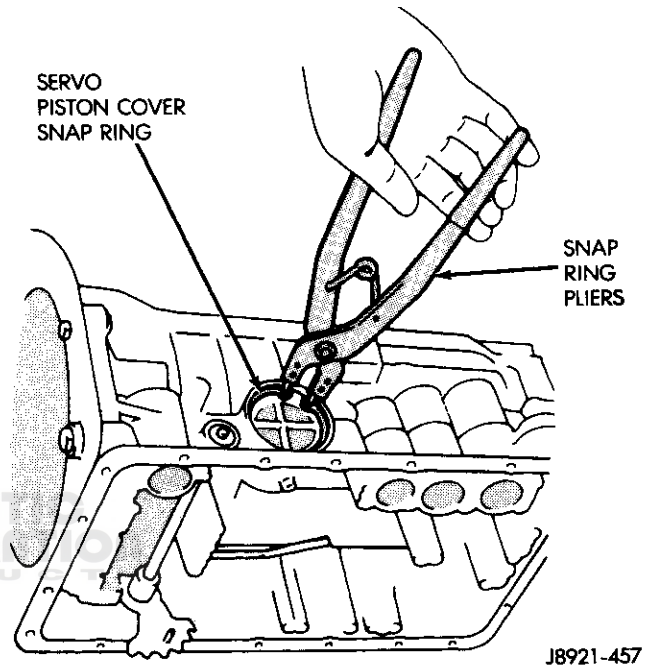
Removing/Installing Servo Piston Cover Snap Ring
